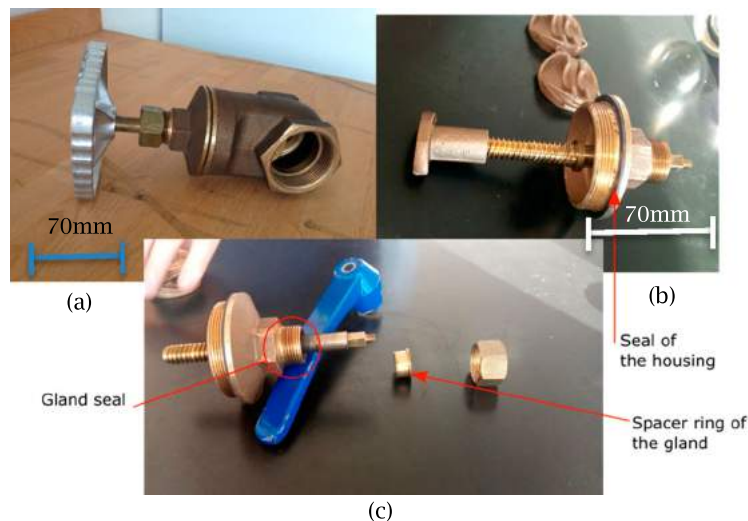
(a) Hydraulic gate valve assembled and (b) major components of this valve showing the seal of the housing, (c) gland seal with its spacer ring and nut placed on the housing cap.
